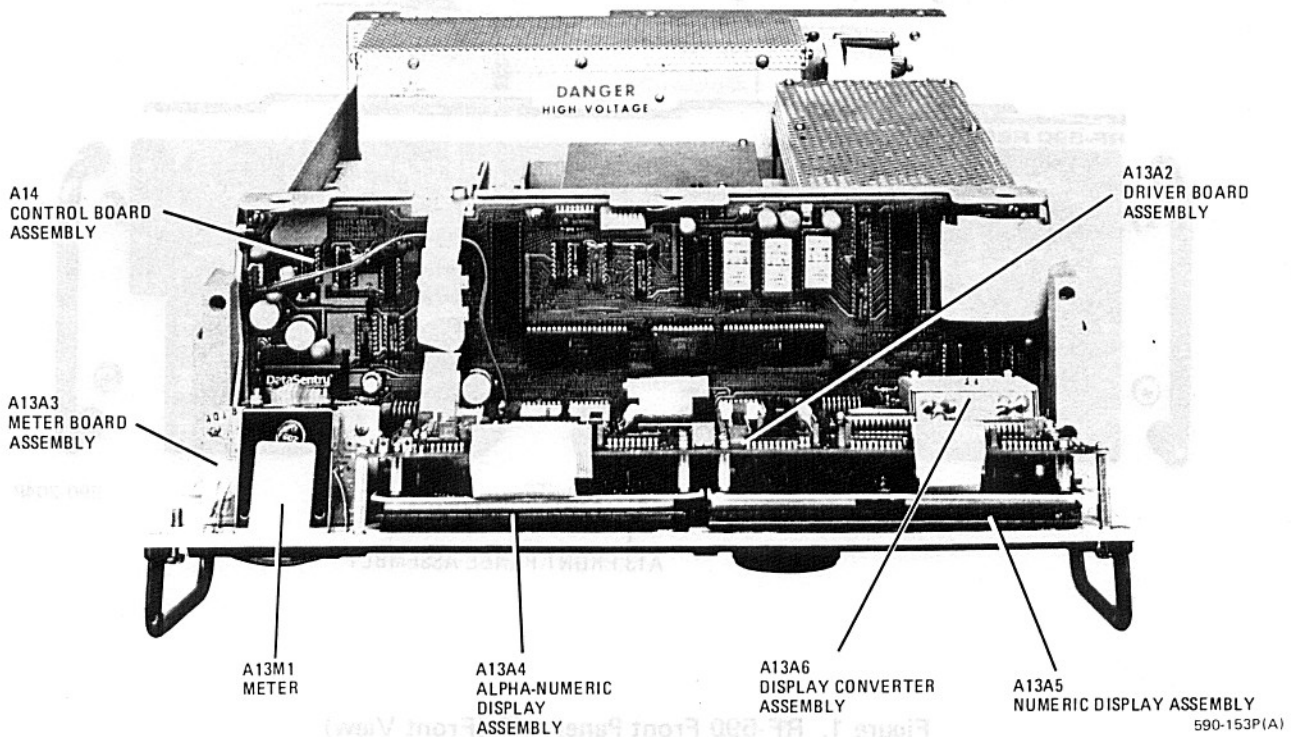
RF-590 Front Panel Assembly A13 (Rear View)
